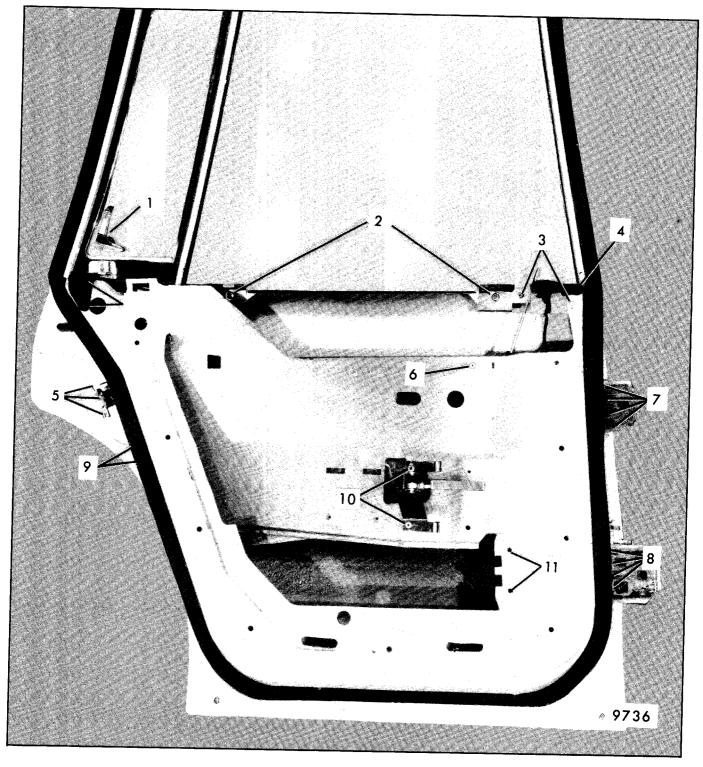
Rear Door Hardware Attachments - A Sedan Styles (A-35 Shown; A-09,19 Similar)
